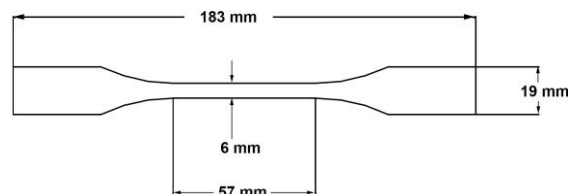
Specimen dimensions for tensile test based on ASTM D638 (Thickness = 4 mm)
